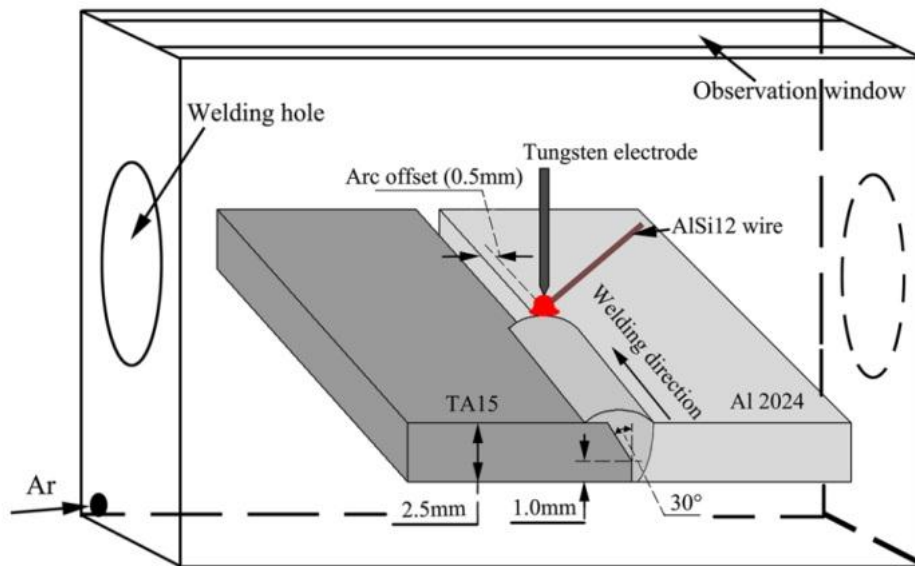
Schematic drawing of the GTAW welding set up [8].
